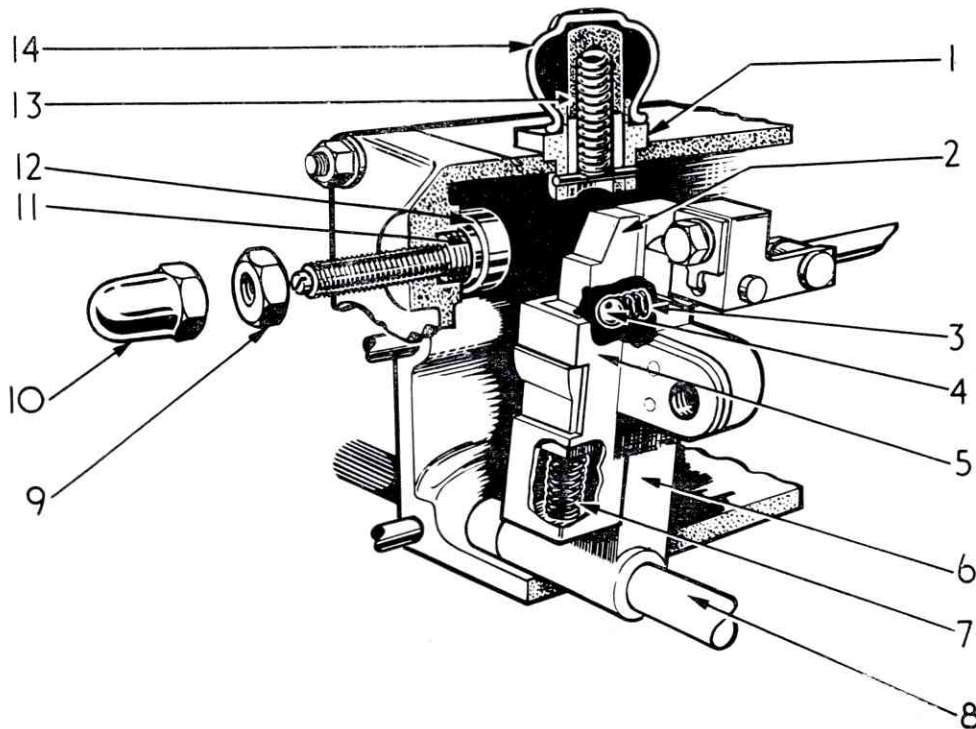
MAXIMUM FUEL STOP AND BULKING TYPE EXCESS FUEL DEVICE
